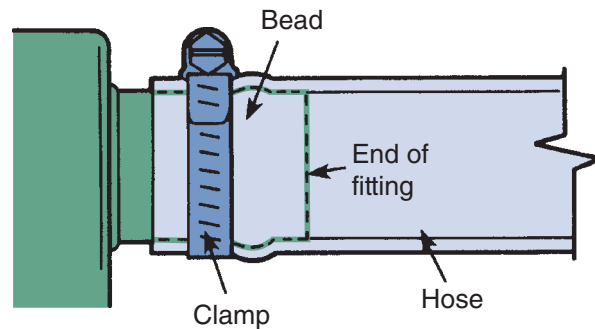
New clamps should be placed immediately after the bead of the fitting.
